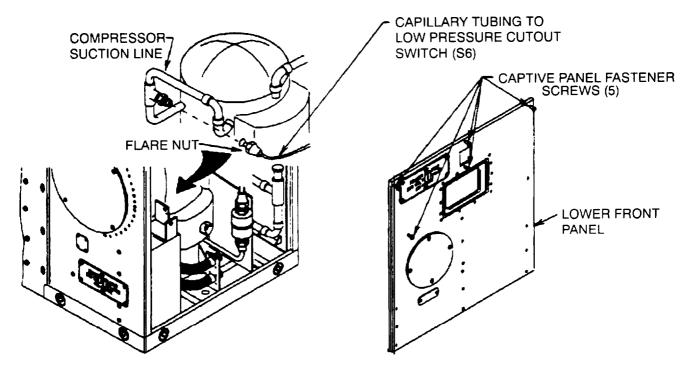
Flare Nut Disconnect for Low Pressure Cutout Switch (S6)
